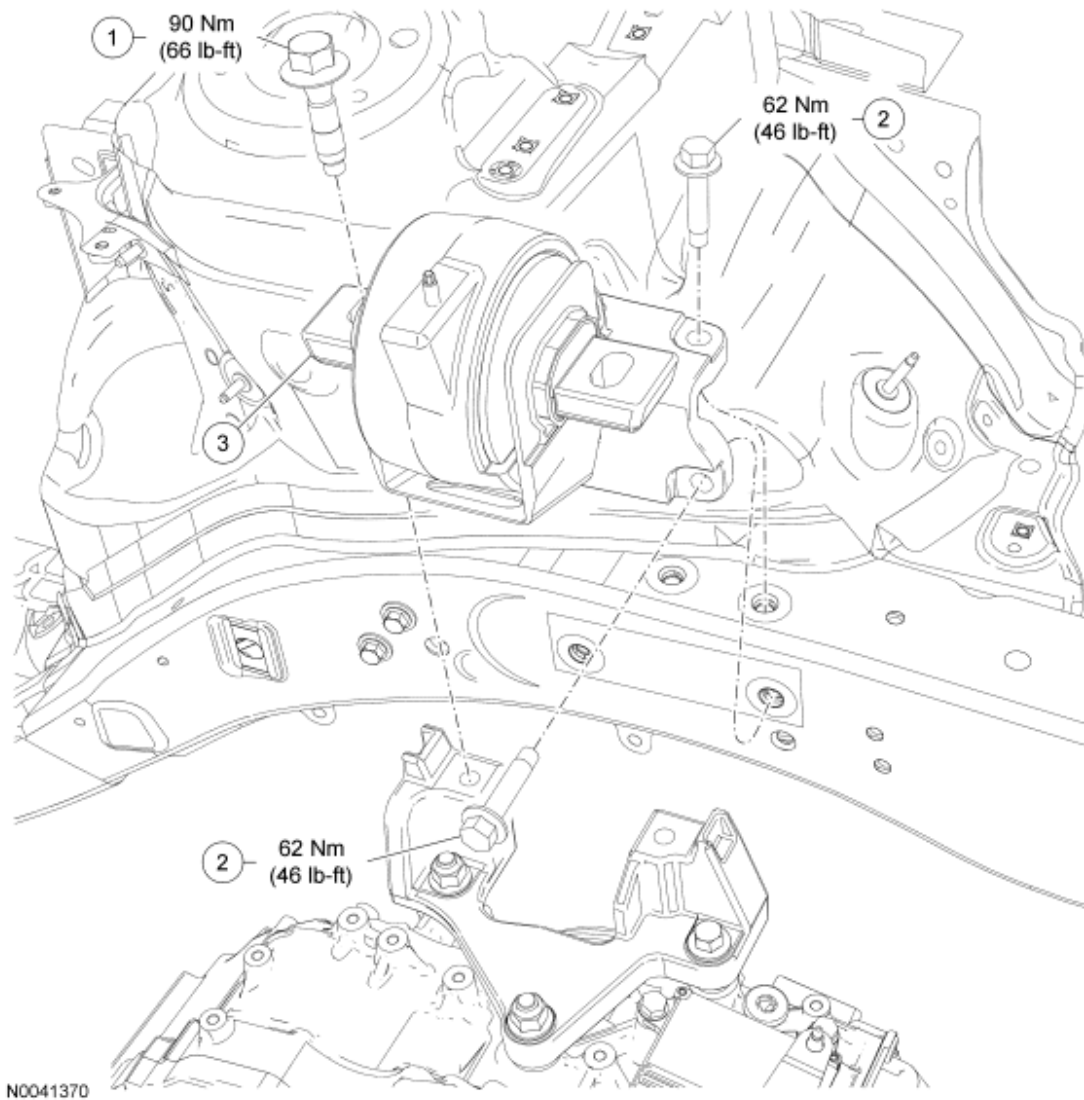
Exploded View Of Transaxle Support Insulator With Torque Specifications
